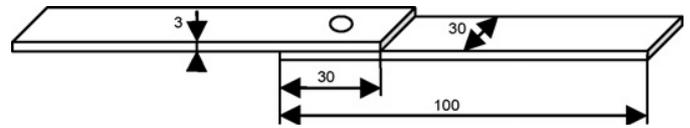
Schematic diagram of the tensile specimen for joint testing.
